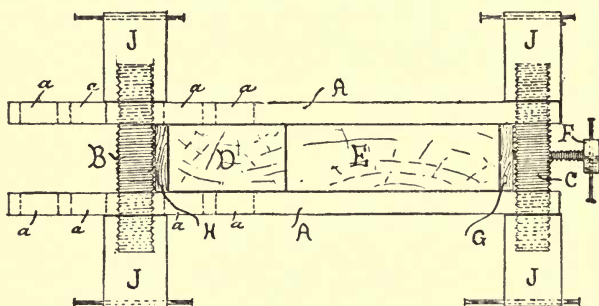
Edge view of Adjustable Clamp for holding flat glued work, made from iron bar and pipe fittings.
